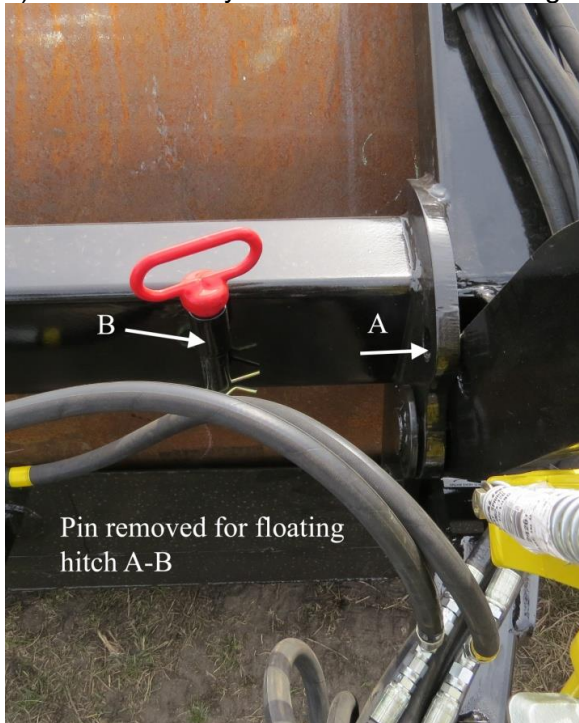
FLOATING HITCH PIN REMOVED & HYD VALVE FOR DIAG ARM
